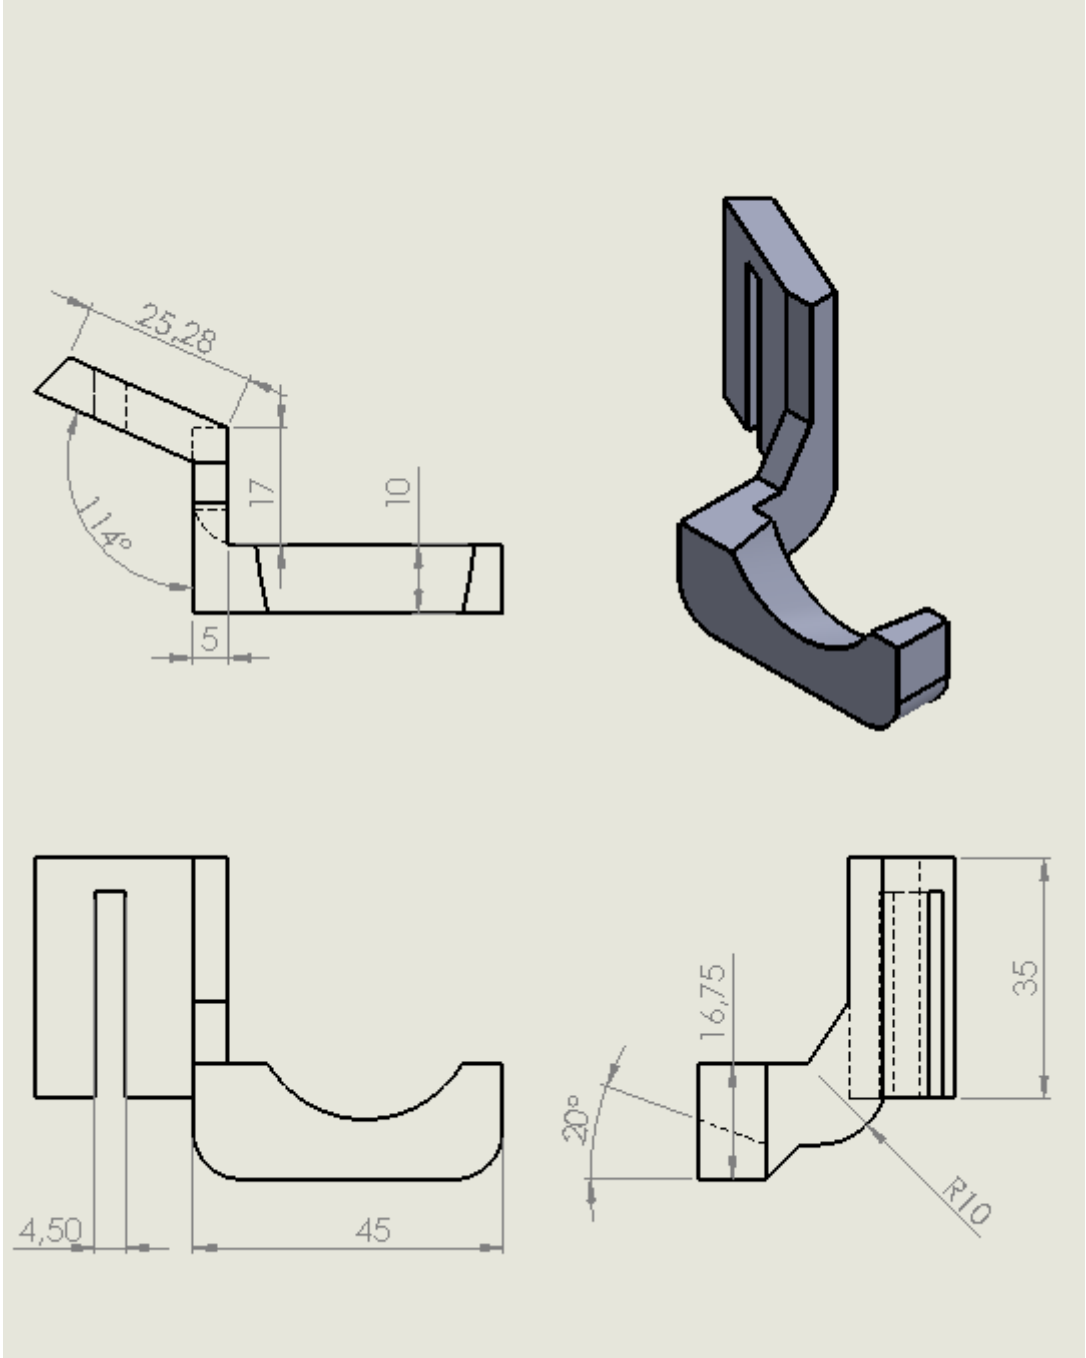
Drawing of the "Buffer glass fixture 2" with dimensions.
